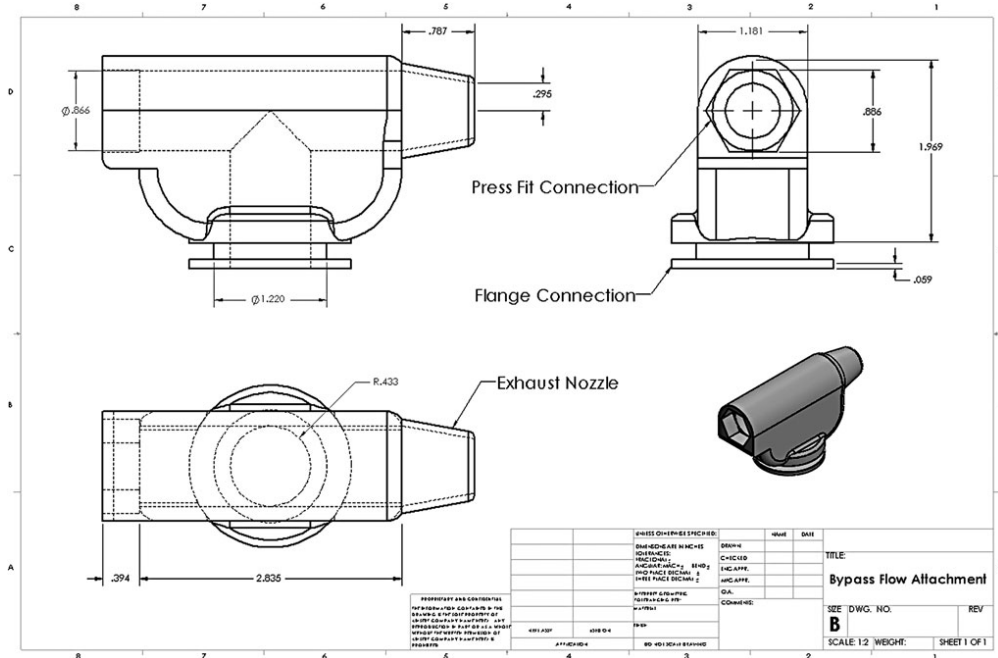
A schematic of the bypass flow attachment with dimensions called out in inches. It outlines a press fit connection for the inspiratory line, a flange connection for the facemask, and exhaust nozzle open to the atmosphere.
